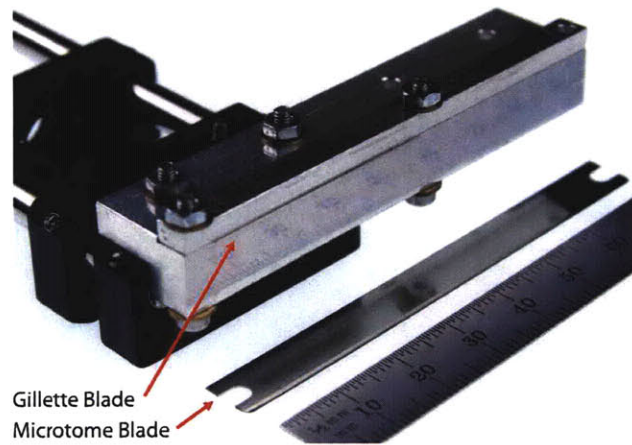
A Gillette blade is shown clamped onto the blade holder. Alternatively, a microtome blade may be clamped to the bottom surface of the holder.
